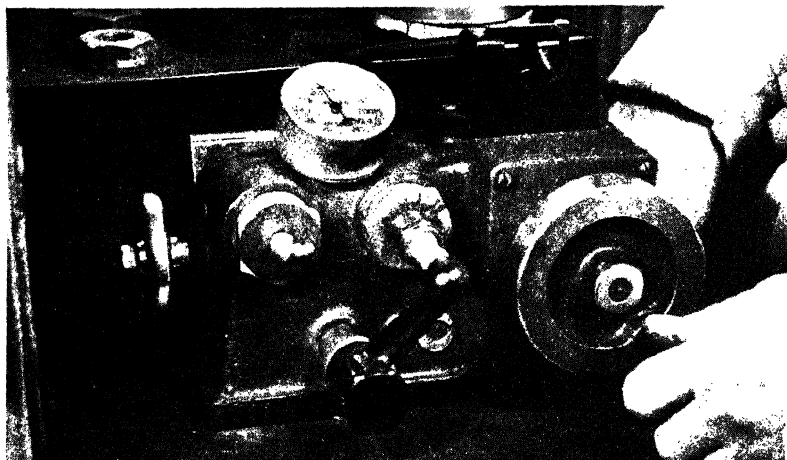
PLUG BEING TESTED UNDER PRESSURE
